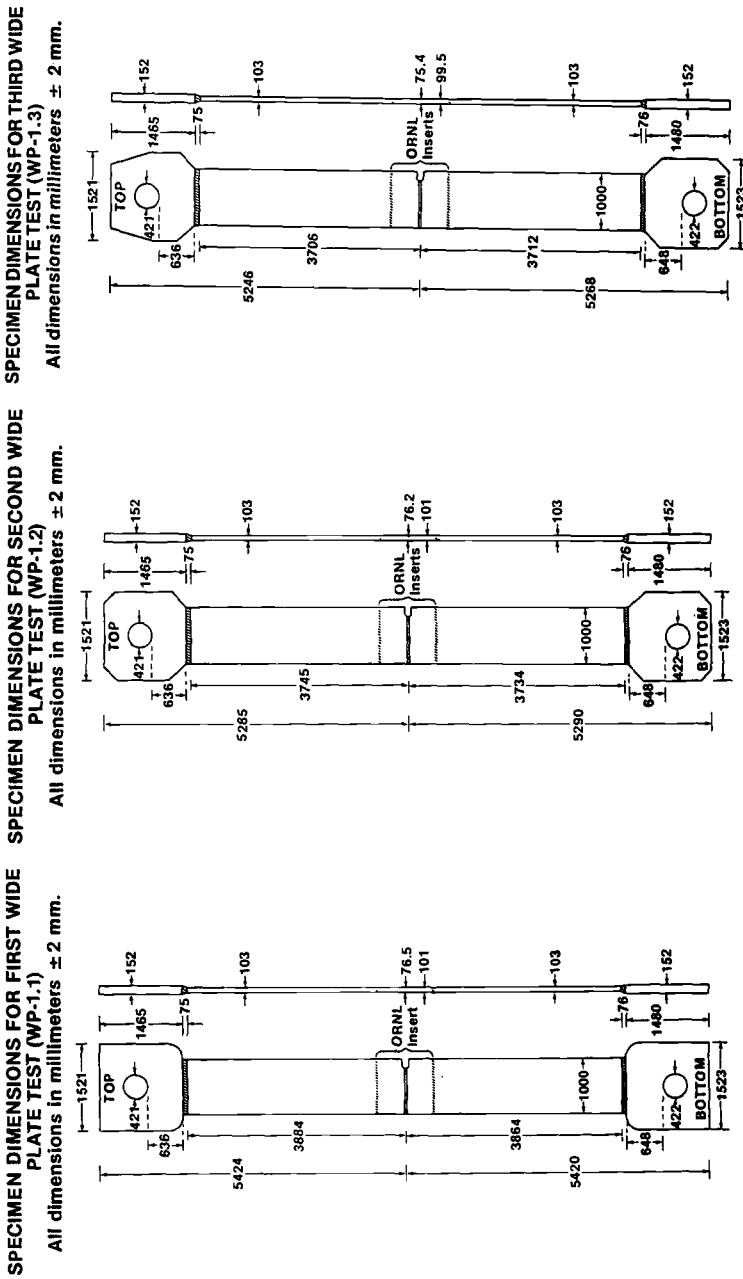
Specimen configurations for the first three HSST wide-plate crack-arrest tests for A533B steel: WP-1.1.1 (left), WP-1.2 (middle), and WP-1.3 (right). The dimensions are in millimetres.
